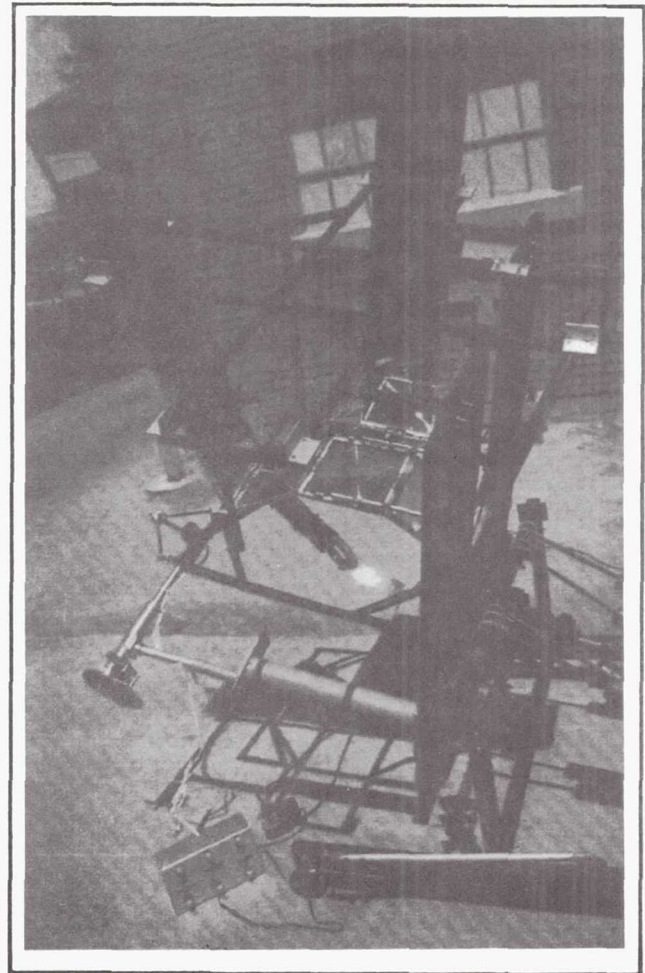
Assembled System Cutting a Piece of Metal at the Focal Point
